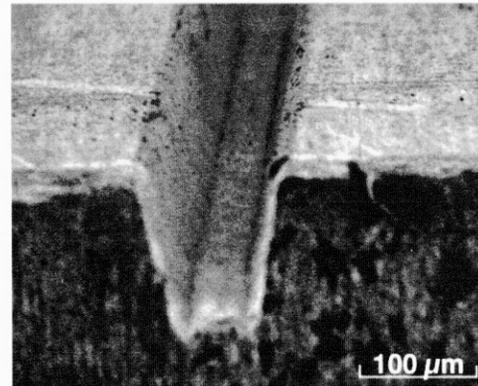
Groove cut in stainless steel with 130-fs flat-top beam.
